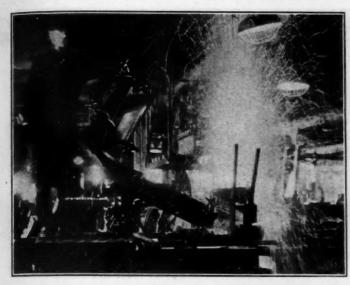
Welding the Back Panel to a Side Panel. The Two Side Panels and the Back Panel Are Welded Into One Unit
